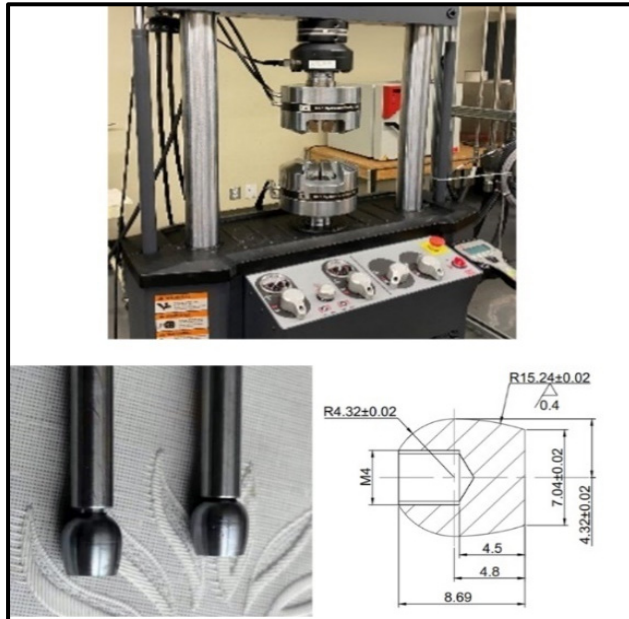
Hydraulic tensile compression machine used for the die expansion tests and die details
